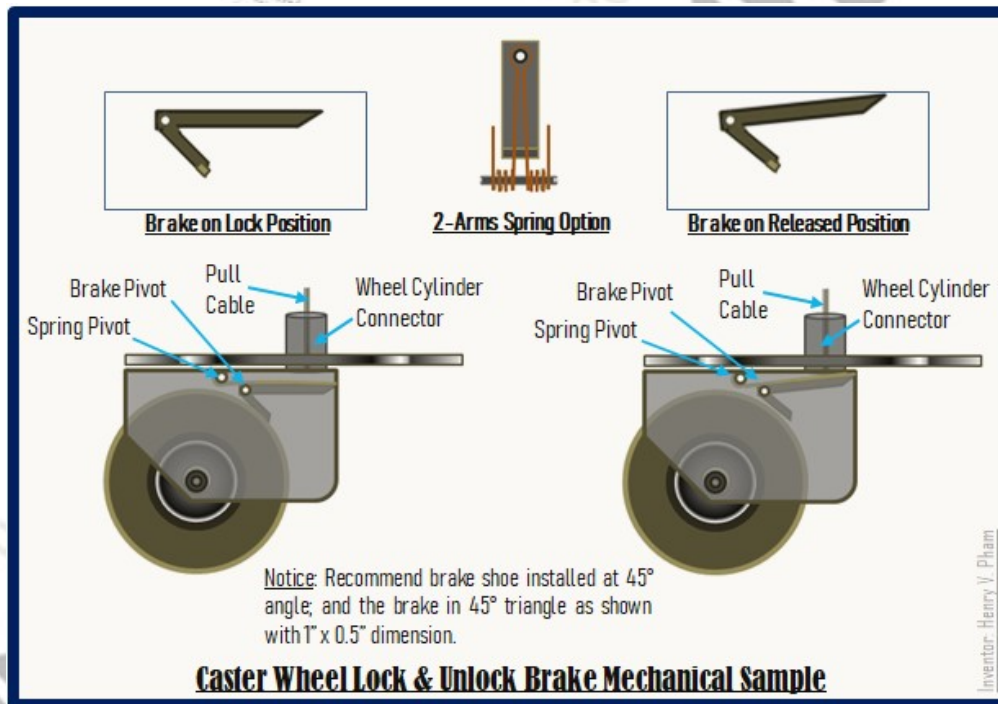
360° Stand G-Rotator Fan - Caster Wheel with Brake Sample
